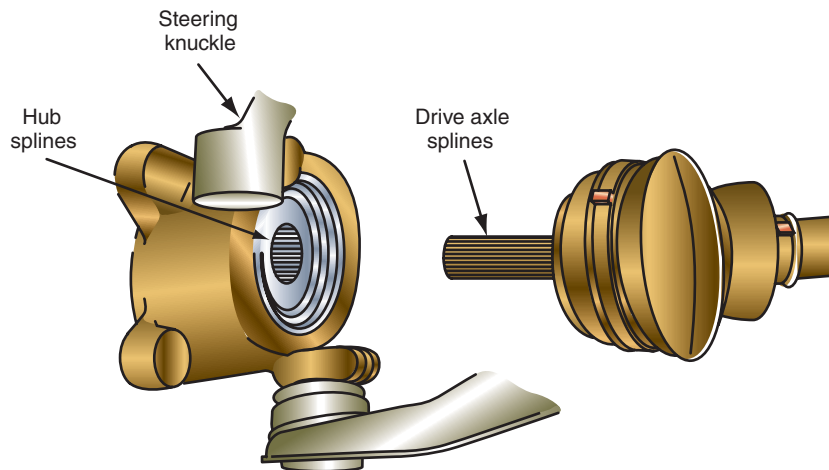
Double-row, sealed wheel bearing hub unit.
